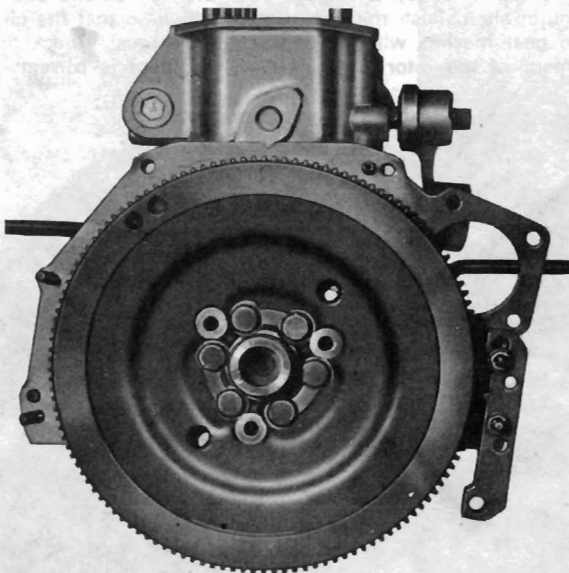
Flywheel jammed with typical lockplate (Sec 8)
